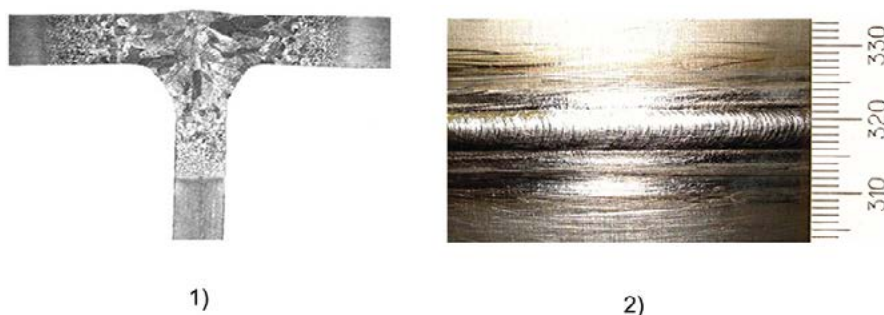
Welded T-joint of the VT-20 alloy 2.5 mm thick: 1 – macrostructure; 2 – surface view from the face side
